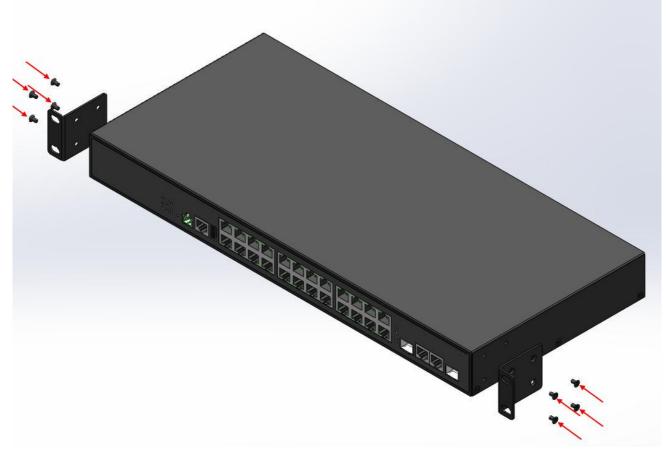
The Top View of the Switch and Rack Mounting Bracket
